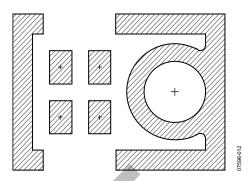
Example PCB Land Pattern with Broken Enclosing Ring
